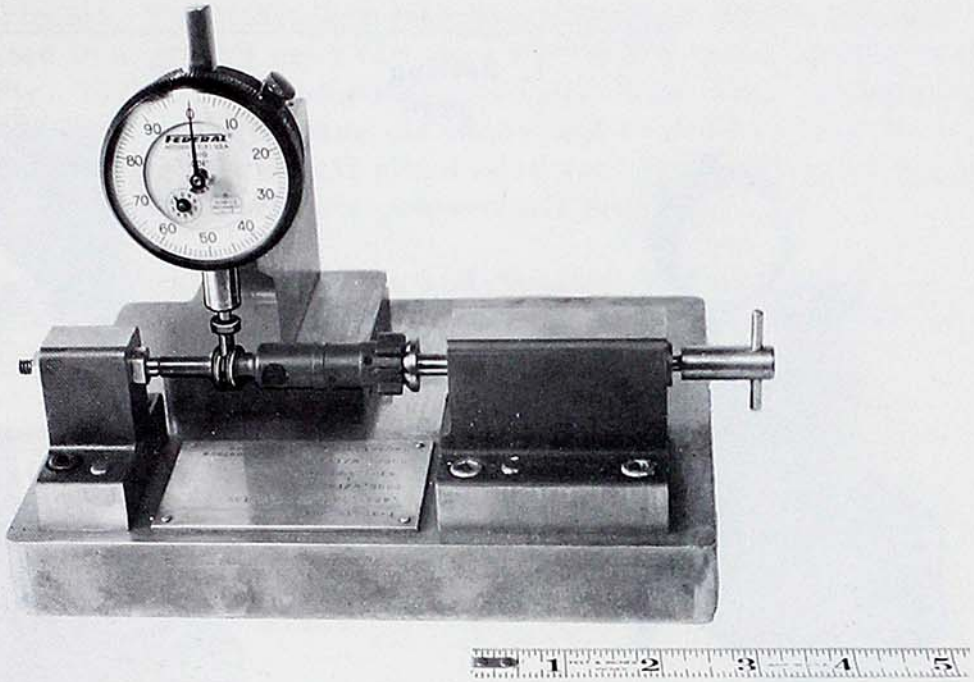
Dial Indicator Gage in Position for Checking Bolt Ring Groove Diameter Concentricity.
